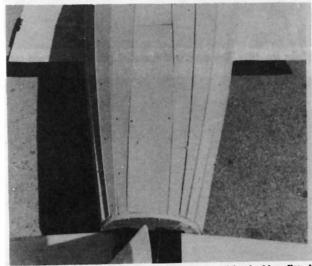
Aft deck rear contour guide with planking fitted. Note holding nails.
